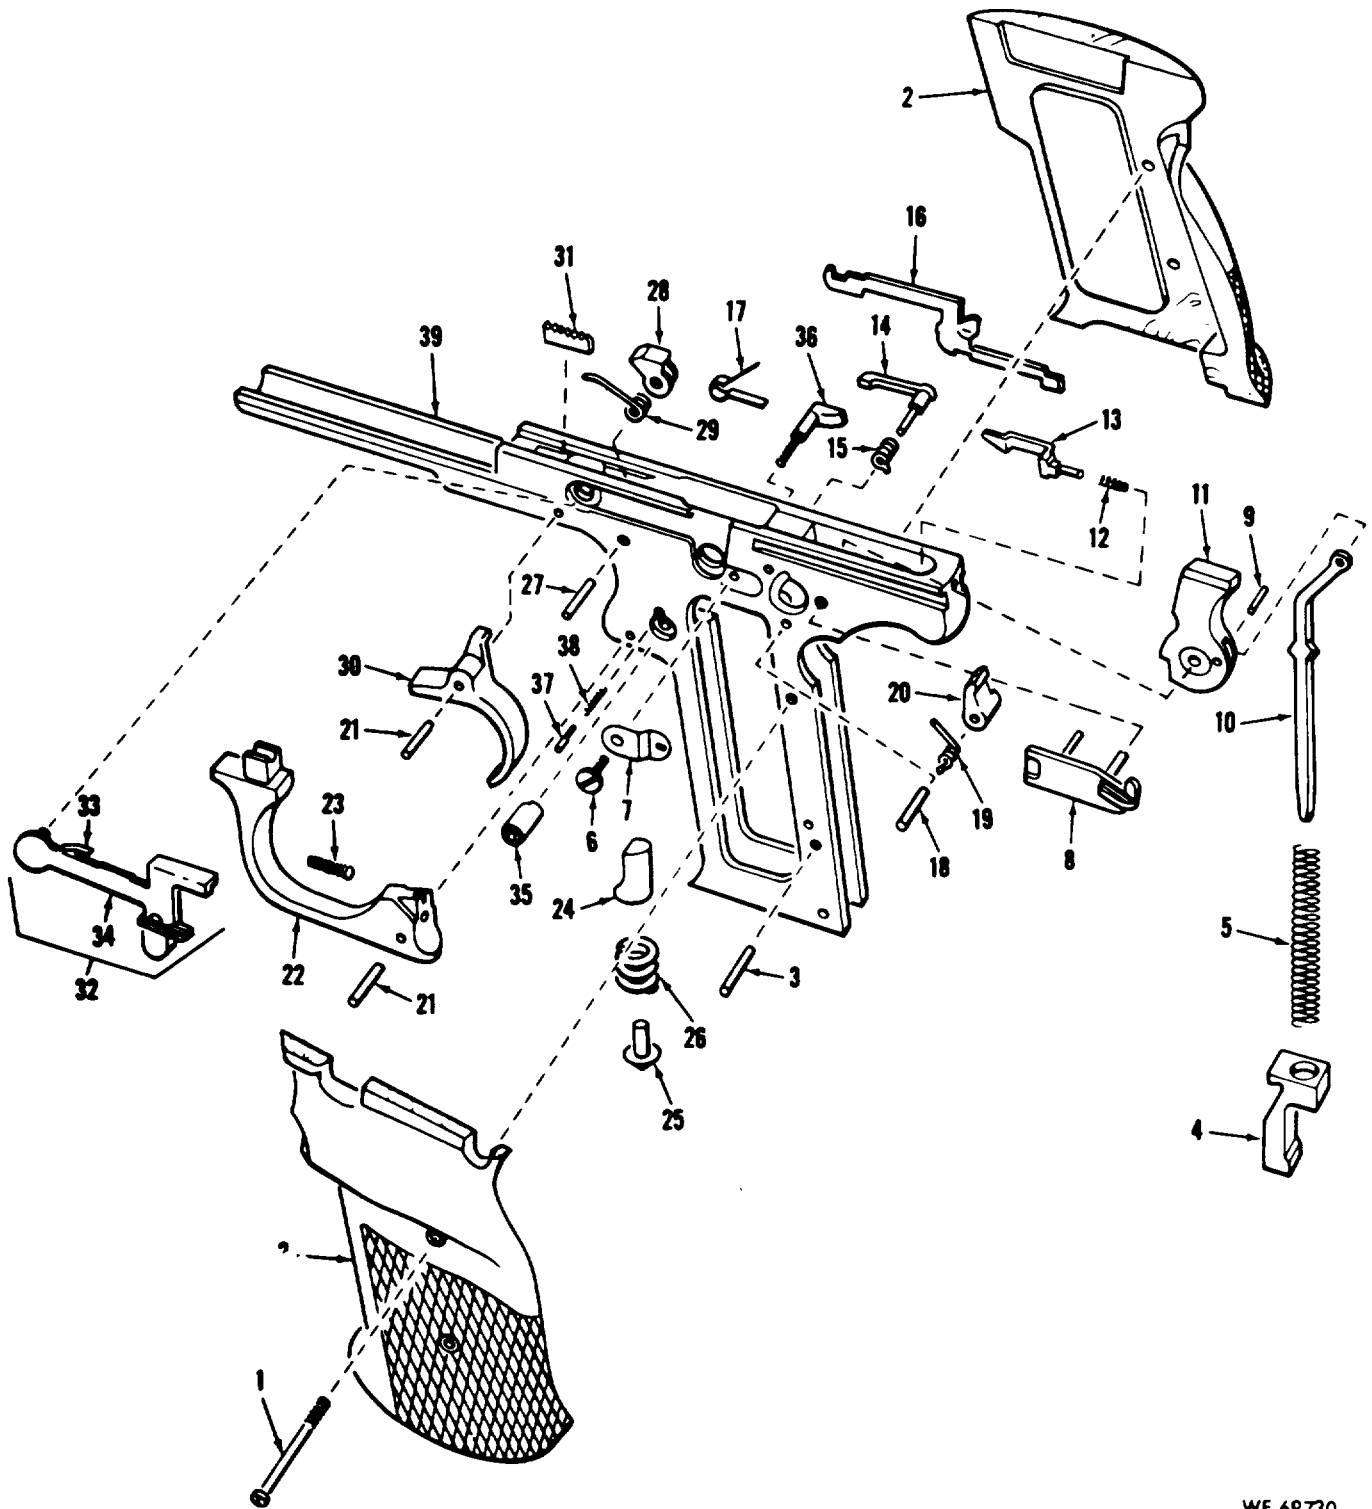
Receiver group for Model 41 Smith and Wesson cal. .22 automatic pistol-exploded view.
